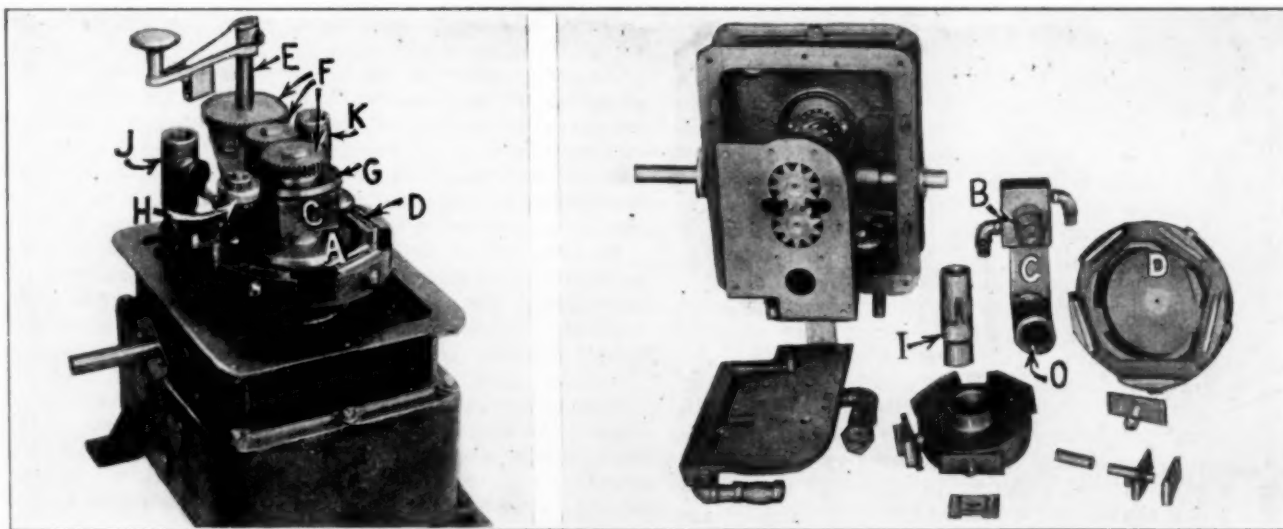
CONTROL BOX WITH COVER REMOVED AND ITS WORKING PARTS
